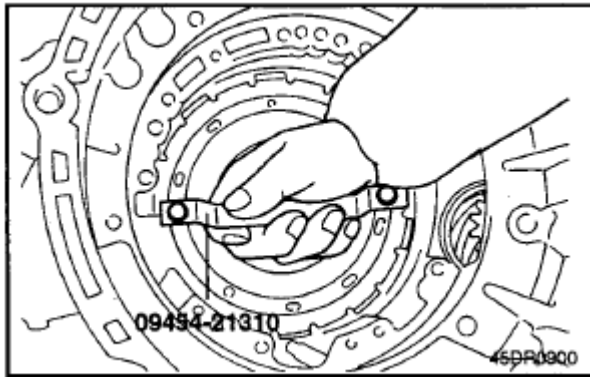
Attaching Special Tool (09453-21310) On Center Support
